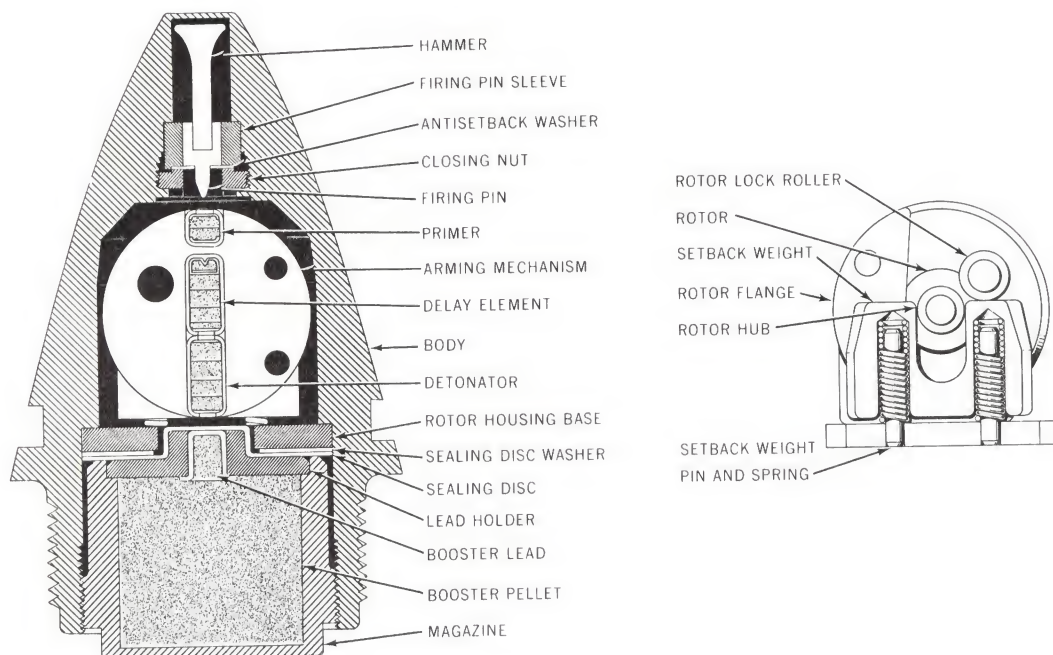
Armed Fuze Assembly and Rotor Arming Mechanism Removed From Fuze.
